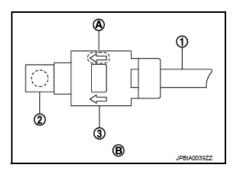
Identifying Quick Connector Cap, Under-Floor Piping And Fuel Feed Hose Courtesy of NISSAN NORTH AMERICA, INC.
